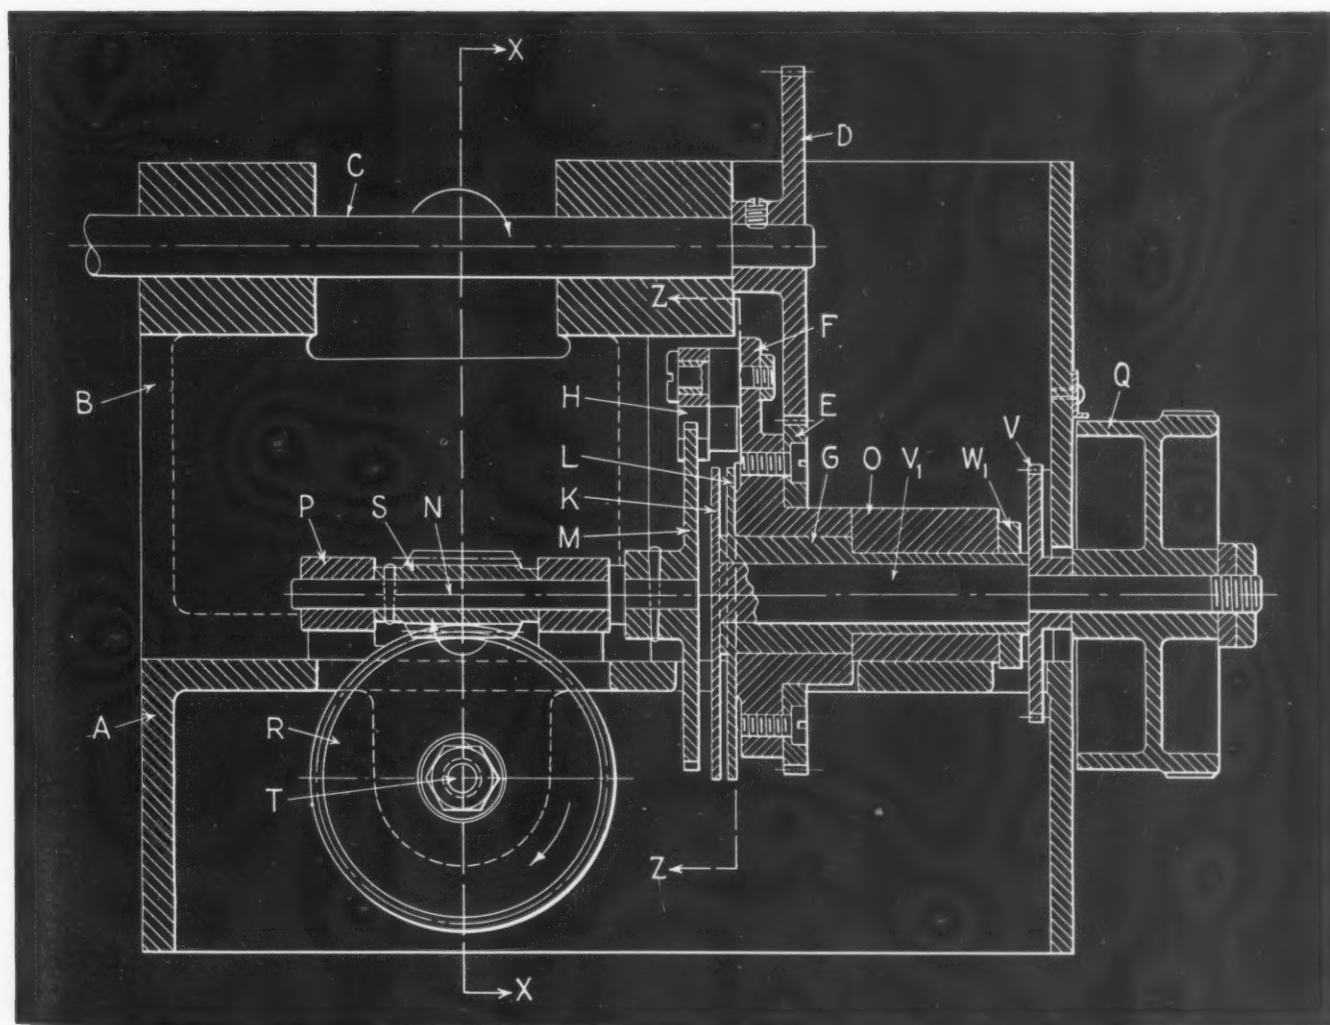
Section Y-Y of Fig. 1, Showing how the Feed-screw *T* is Turned by Worm-wheel *R*, Worm *S*, Shaft *N*, Ratchet Wheel *M*, Pawl *H*, Pawl-carrier *F*, Driven Gear *E*, Drive-gear *D*, and Drive-shaft *C
